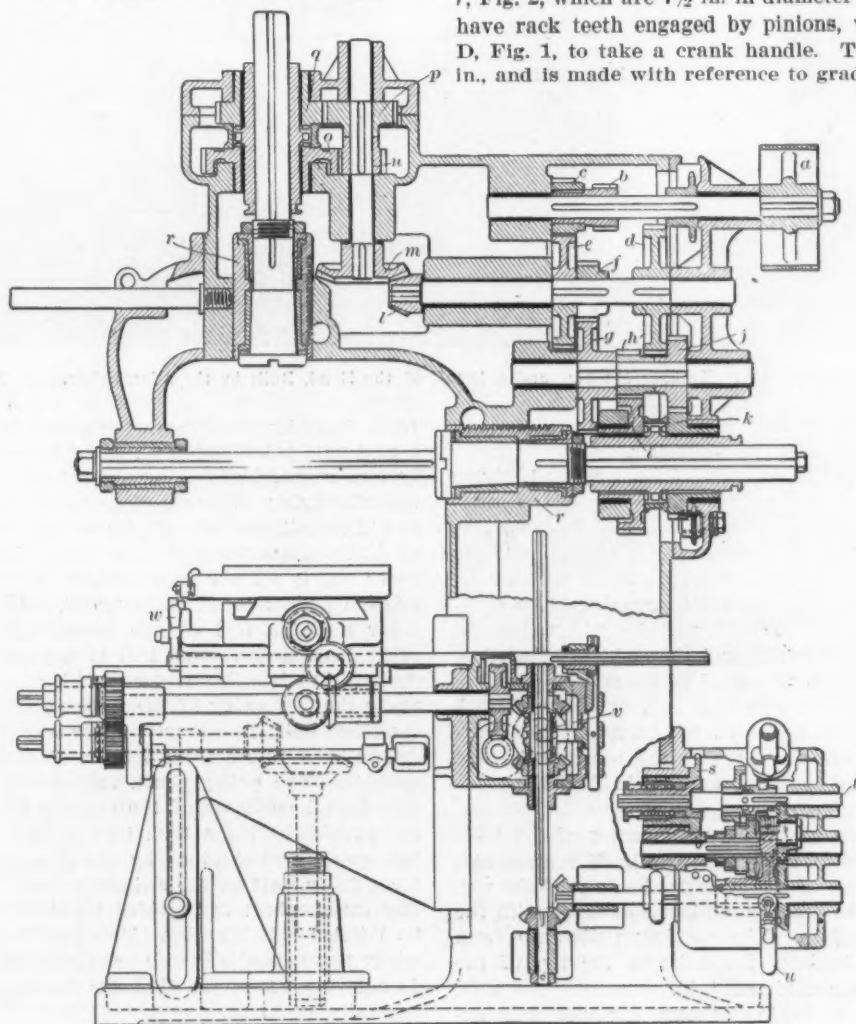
A Transverse Section of the New Ingersoll Combined Horizontal and Vertical Spindle Milling Machine.
